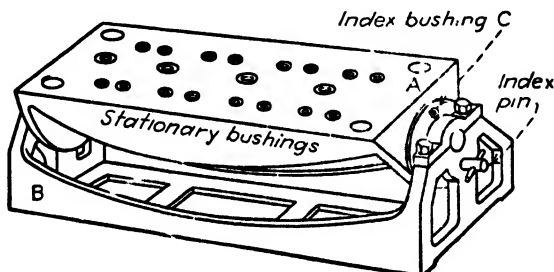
Large rotary-type jig with indexing pin. Work bolted to underside of *A* which turns in body *B* and has indexing bushing *C*. Rotary jigs should be balanced for easy handling.
